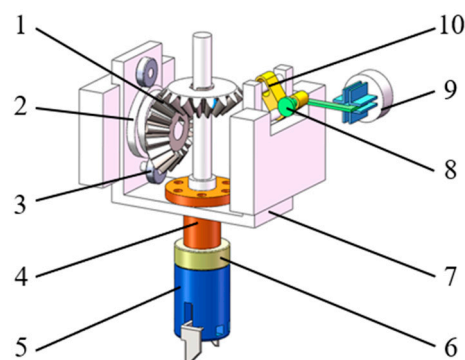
Structure diagram of bag-sealing component (1. Bevel gear. 2. Double cam. 3. Roller. 4. Coupling. 5. Thread tying finger. 6. Elastic ring. 7. U-shaped plate. 8. Cutter. 9. Guide groove. 10. Linkage).
